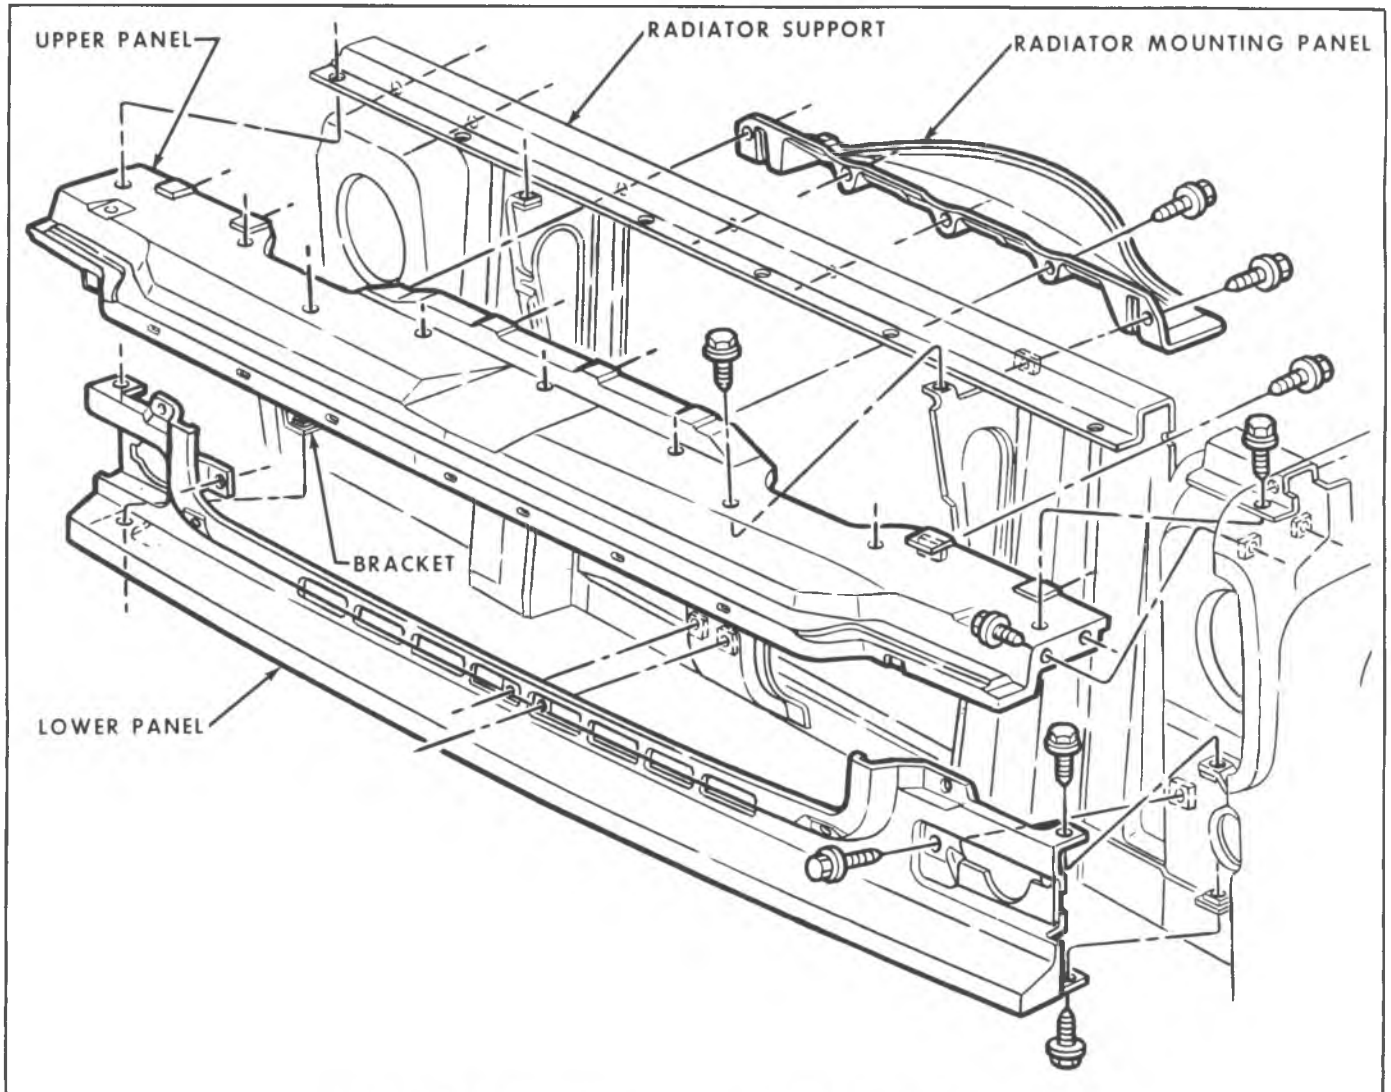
C-20-Radiator Upper and Lower Grille Panels-CK Models
